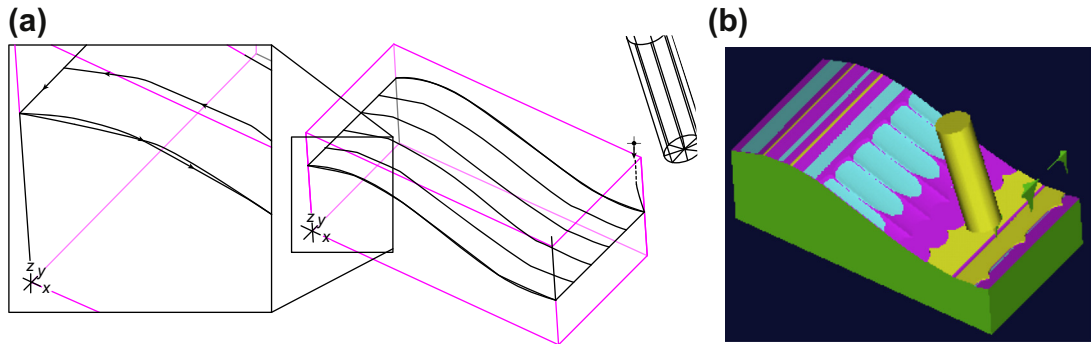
Surface milling for tolerance = 0.5 in. using a flat-end cutter: (a) toolpath and (b) machining simulation.
